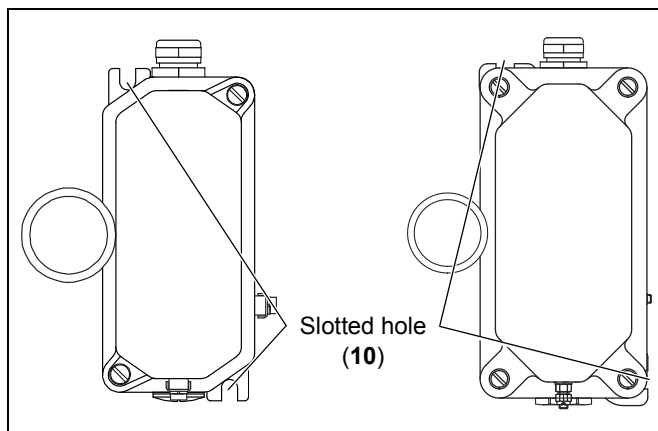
Mounting the belt misalignment switch onto the conveyor
